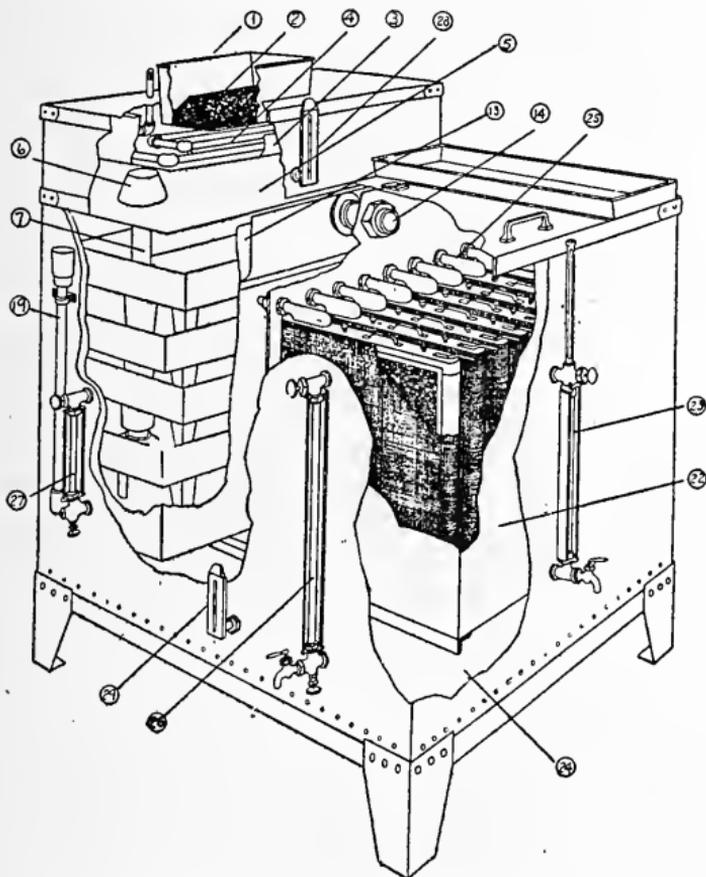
Drawing Showing Interior Construction of Power Plant Oil Filter. (See List of Parts under Fig. 103)
